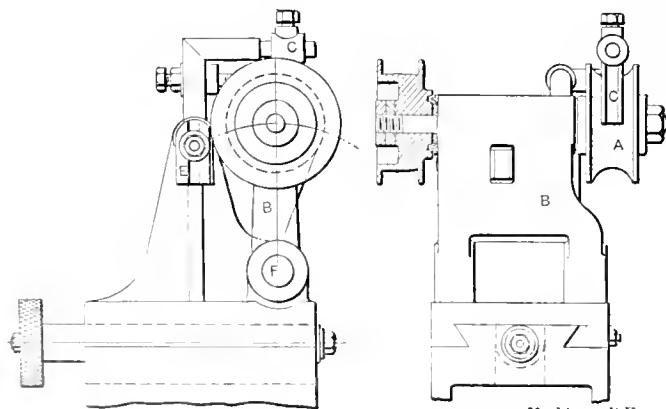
Details of Grinder Similar in Construction to that shown in Fig. 1, but differently Mounted.
